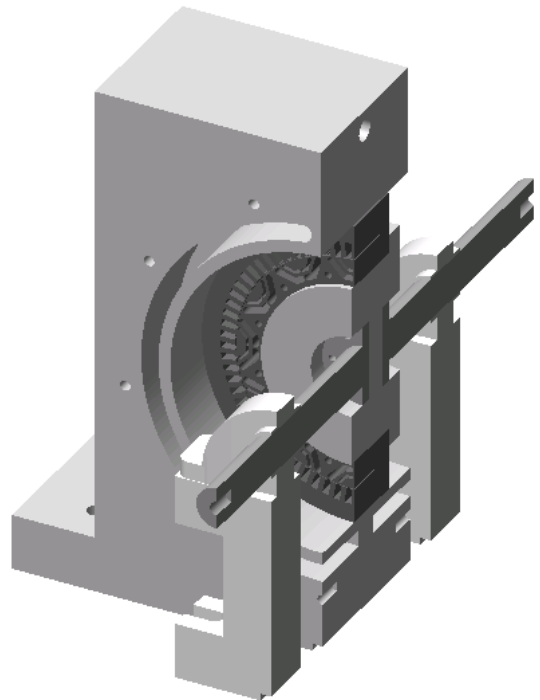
CAD section of experimental motor, housing, rotor hub, and
